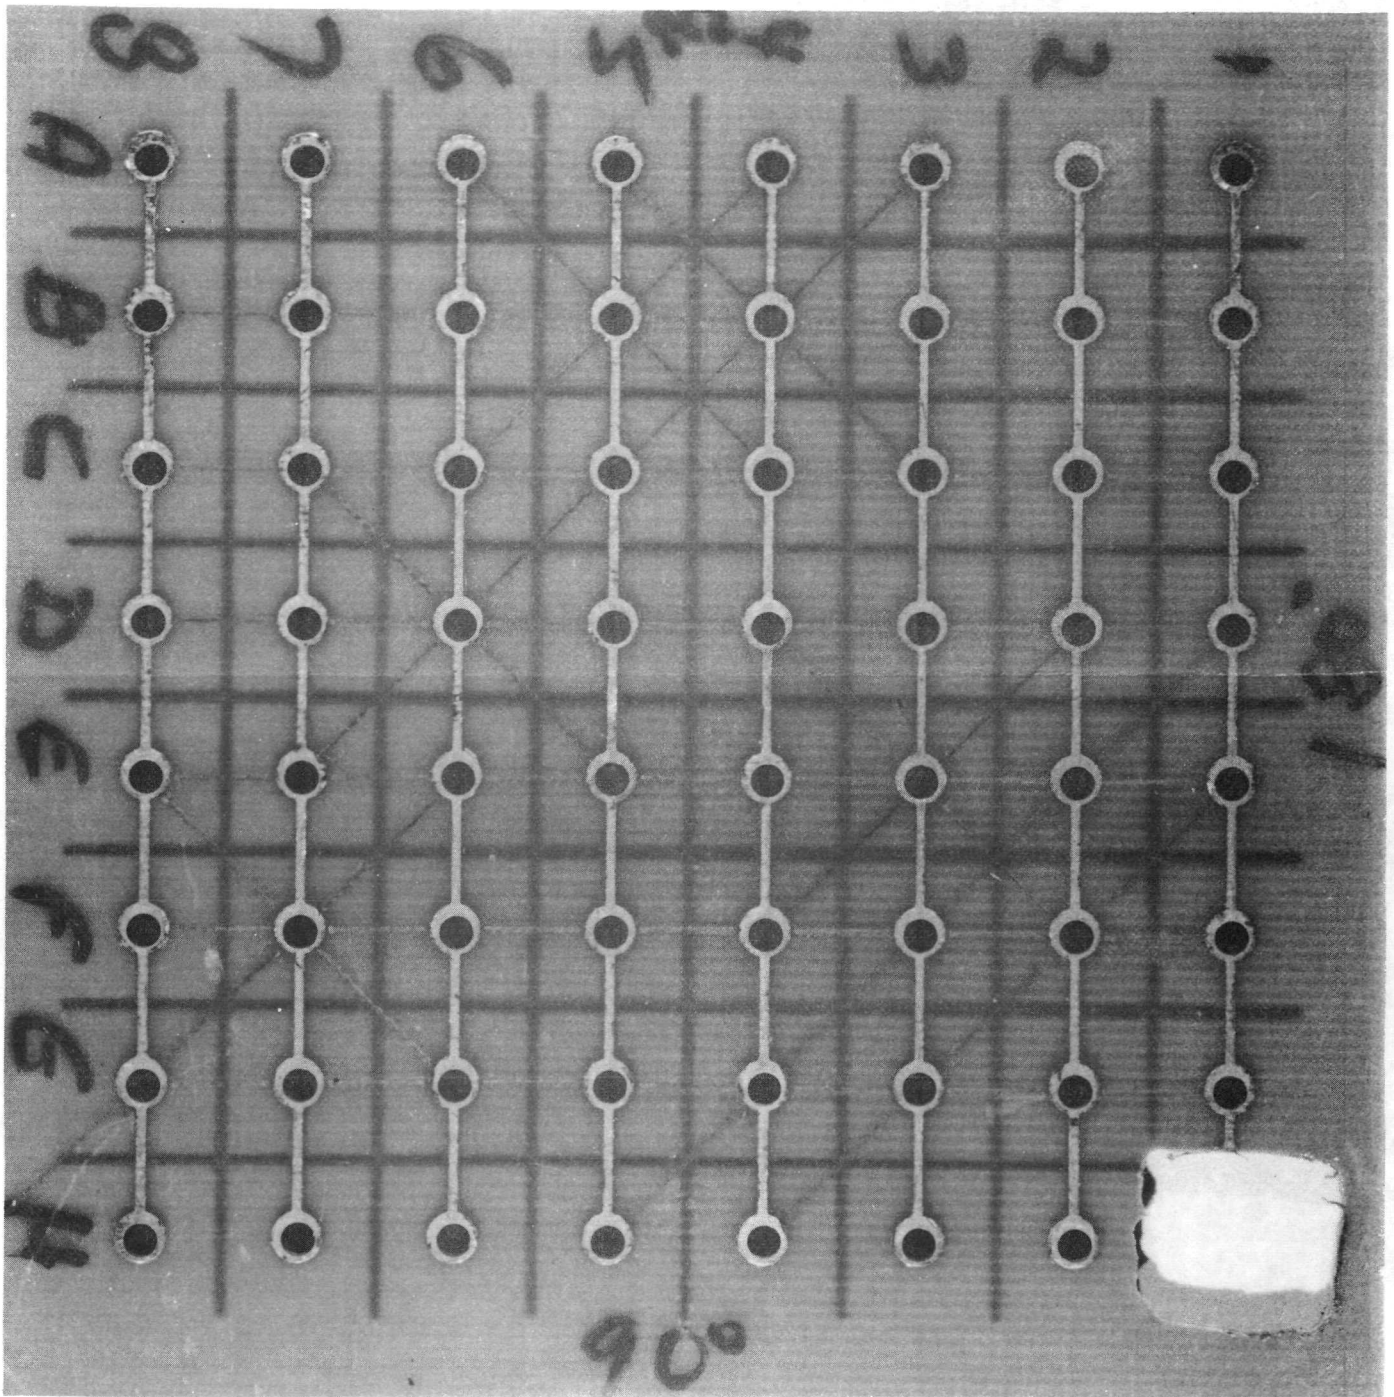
Typical Multilayer Test Board with Hole Size for Evaluation of 0.060 in. Probes
